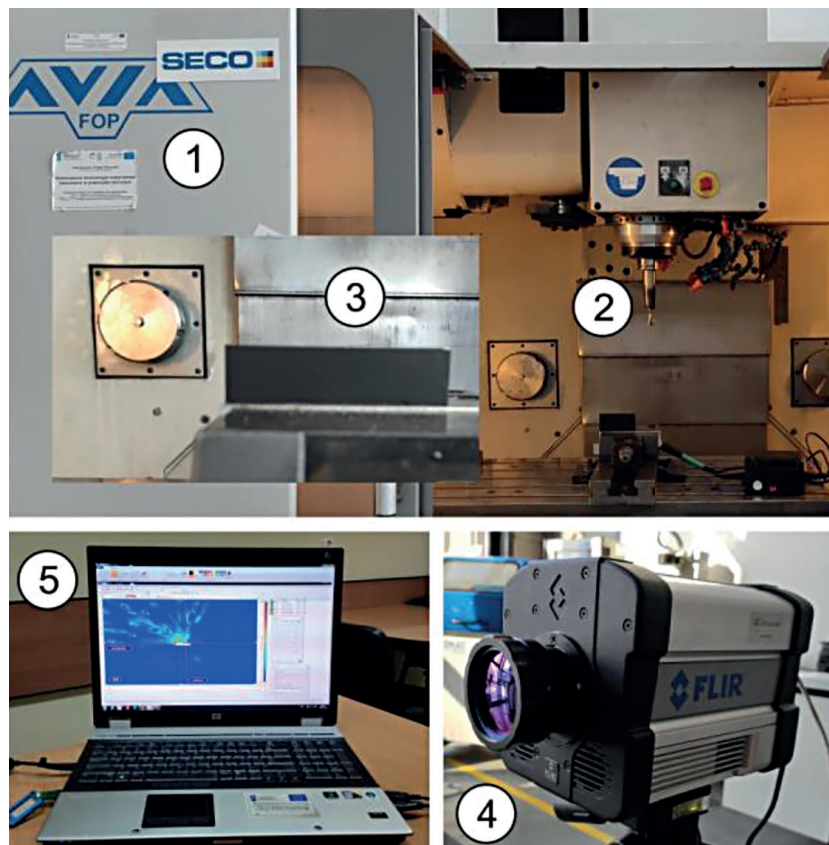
Chip temperature experimental and measurement set-up: 1 – milling machine, 2 – tool, 3 – magnesium workpiece, 4 – FLIR SC6000HS infrared camera, 5 – computer with IR Control software
